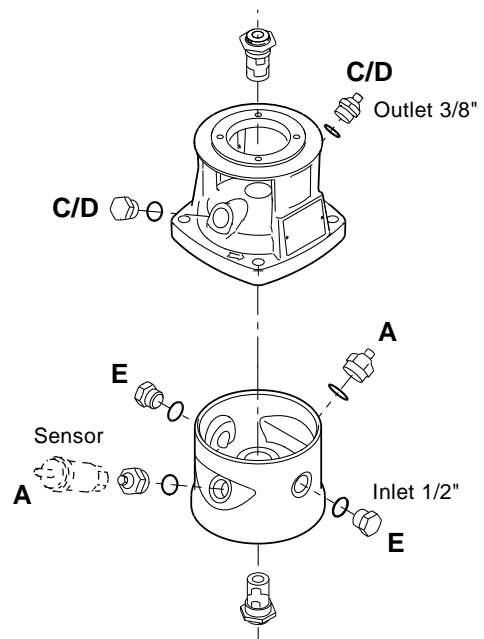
Seal chamber CR, CRI, CRN 1s, 1, 3, 5
